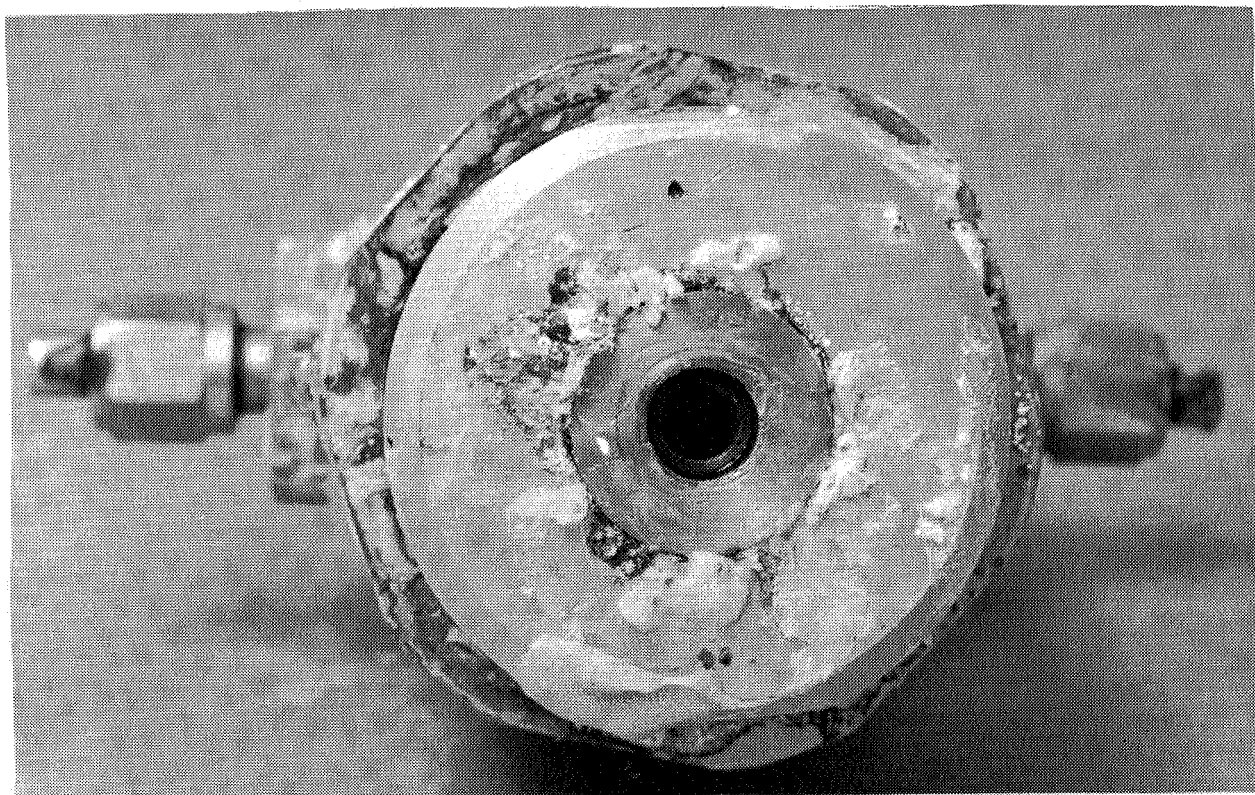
Test Specimen 1, Immediately after Salt Spray Test
